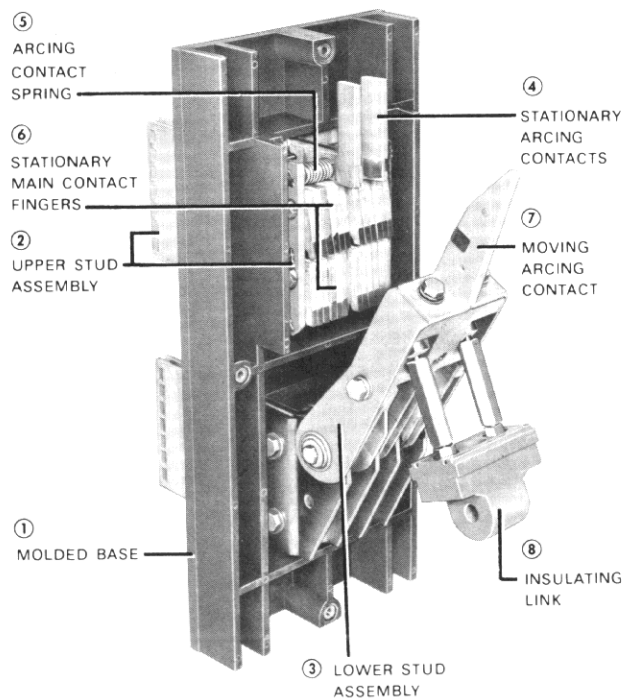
Type DS-840 Pole Unit Assembly—Front View
